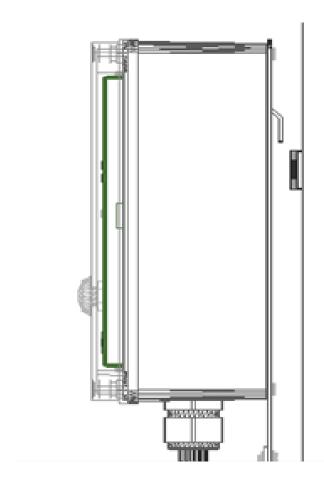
Frontal sideview depicting the retaining screw at the bottom of the enclosure
